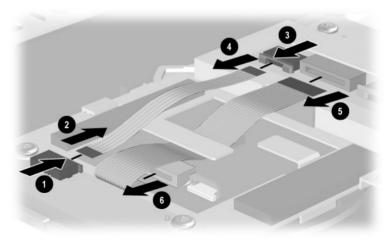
Disconnecting the TouchPad-to-TouchButton Board and TouchButton Board-to-Pointing Stick Board Cables
